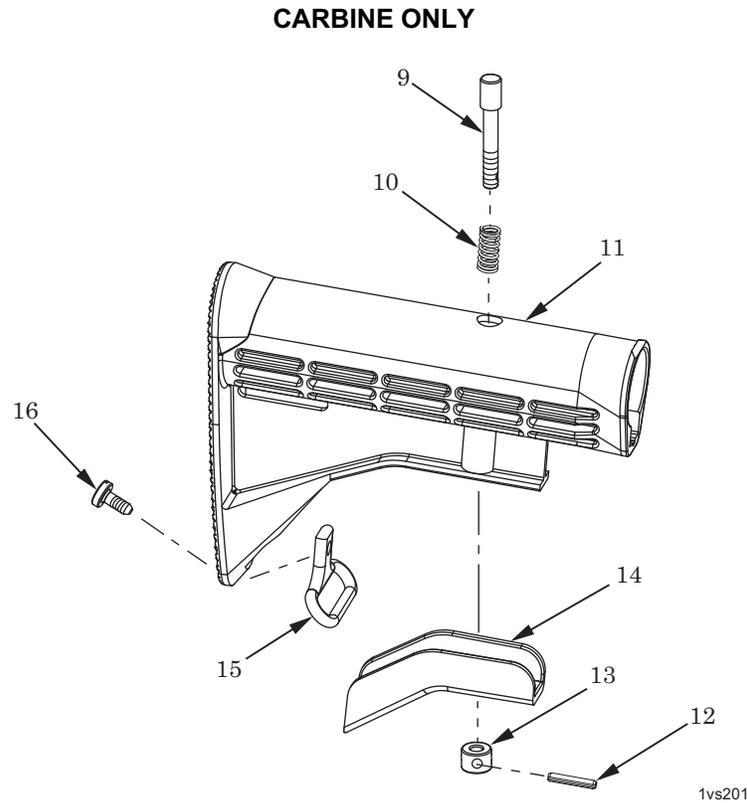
Disassembly/Assembly of Buttstock Assembly (Carbine).
